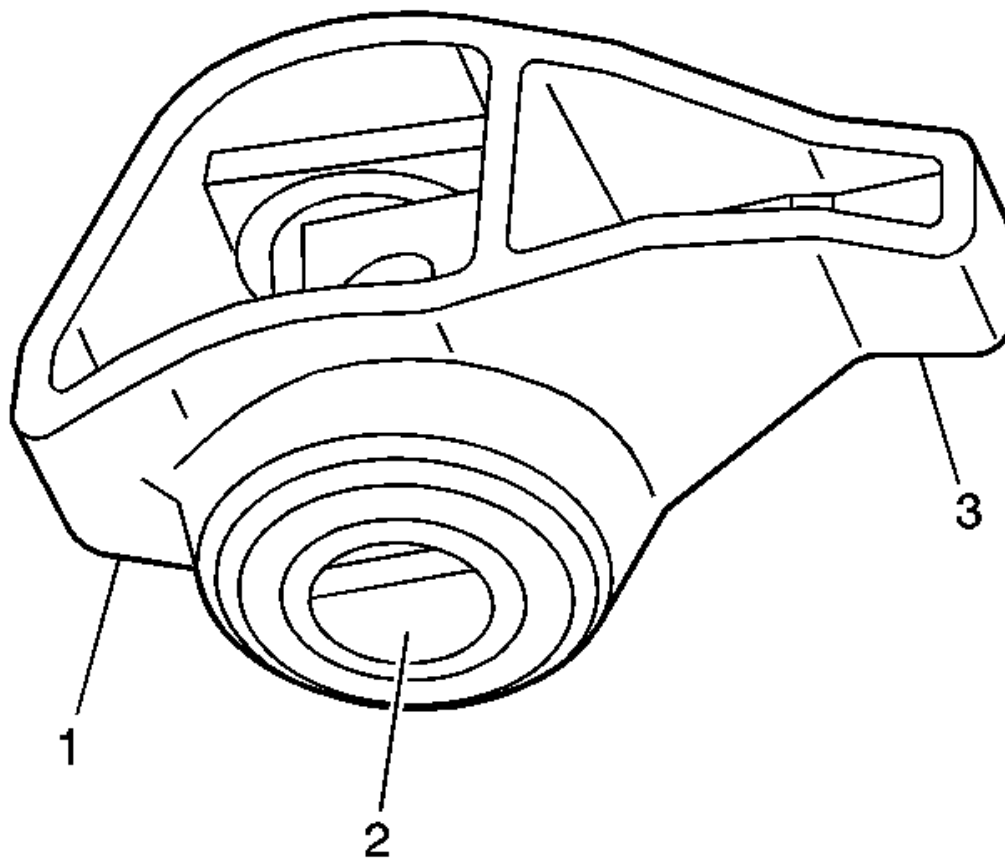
View of Valve Rocker Arm Valve Pushrod Socket Contact Surface, Roller Pivot & Valve Stem Contact Surface
